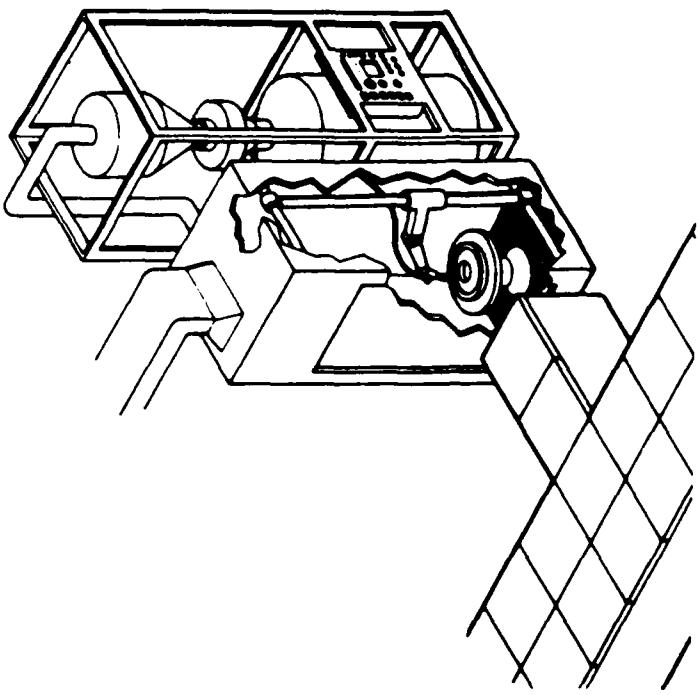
AUTOMATED SHOT PEENING AND GRIT BLASTING SYSTEM (Close-up View).
